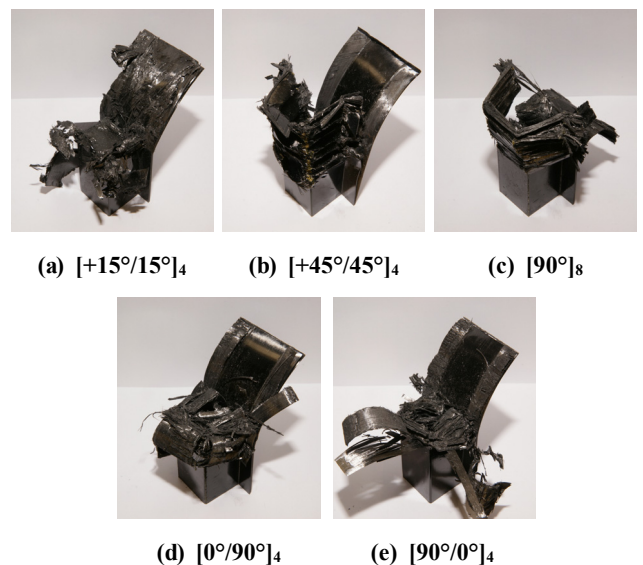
Collapse modes of CFRP single hat shaped structural member
